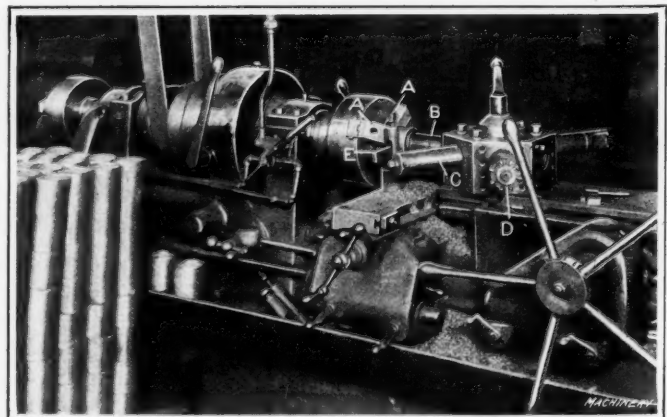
Bardons & Oliver No. 7 Turret Lathe equipped with Hannifin Three-jaw Air Chuck and Tools for facing Open End of Pistons and boring and reaming Hole at End
